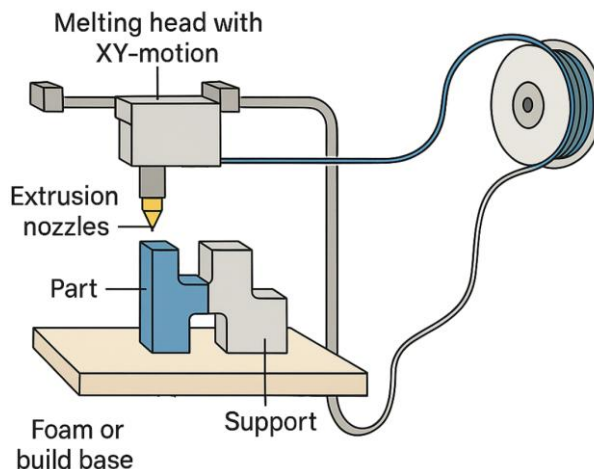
FDM printer components: melting head, dual nozzles, material spools, and Z-axis build platform.
